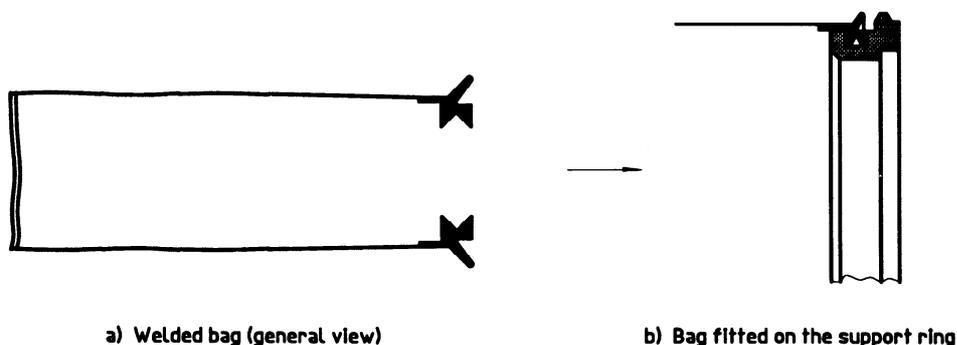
Welded bag ending in a lip seal for fitting on a support ring of type 1
